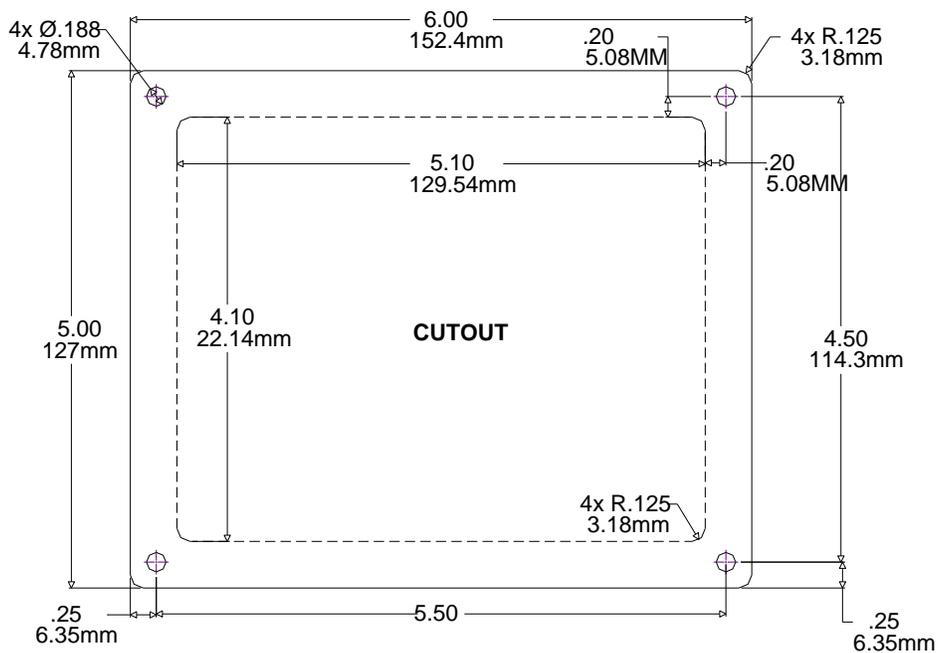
M3534 A9 Chassis Dimensional Outline
